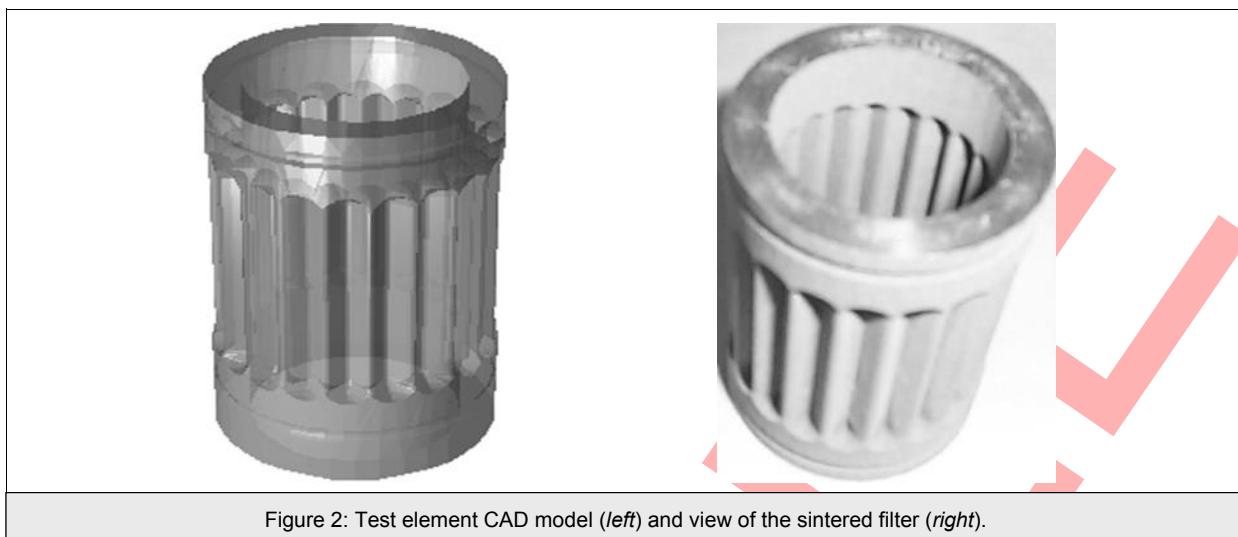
Test element CAD model (left) and view of the sintered filter (right).
